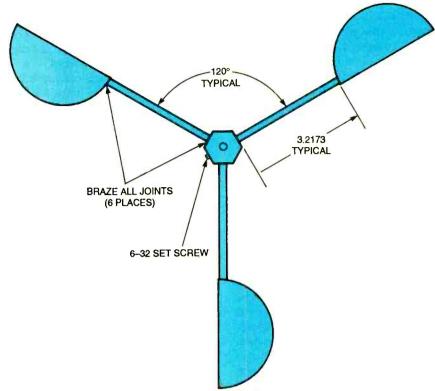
Three rotor spindles were fabricated from 3½-inch lengths of straight ¼-inch diameter peg board hanger, and the wind cups were fabricated from 2½-inch diameter soup ladles.
